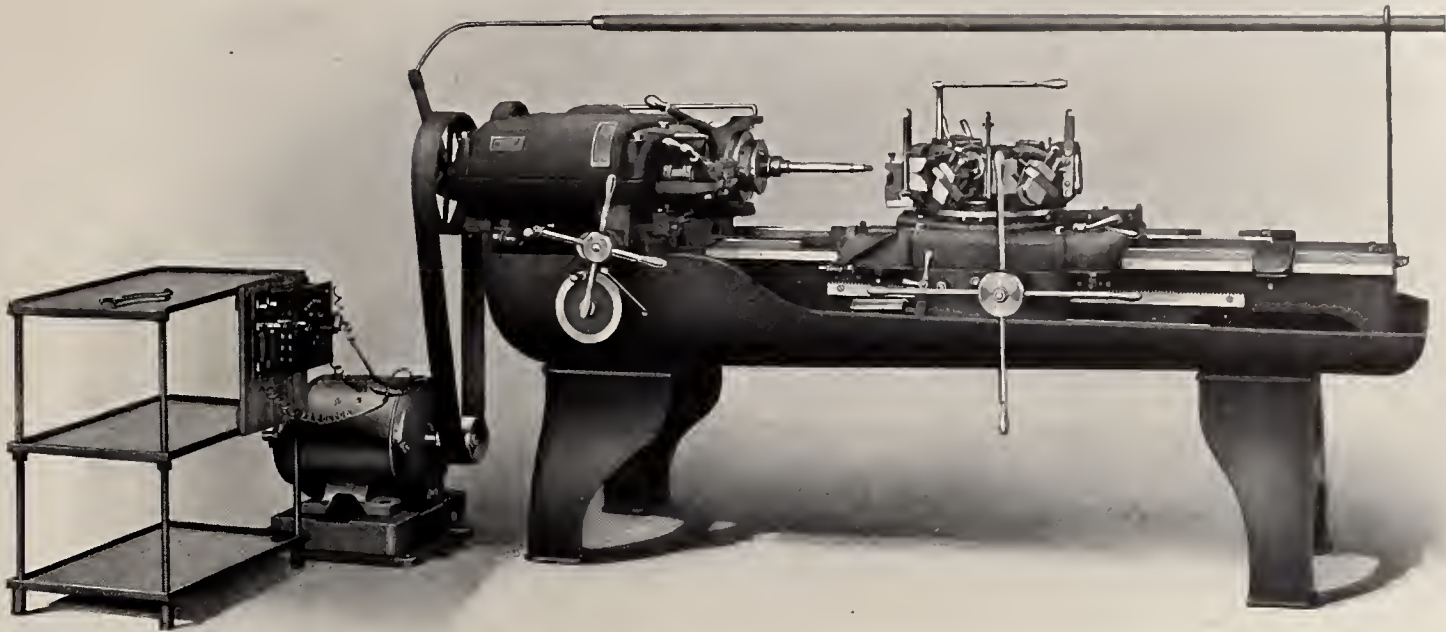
A FLAT-TURRET LATHE WITH CROSS-SLIDING HEAD, MADE BY THE JONES & LAMSON MACHINE COMPANY, SPRINGFIELD, VT., DRIVEN BY A BULLOCK MOTOR. SEE PAGE 241
